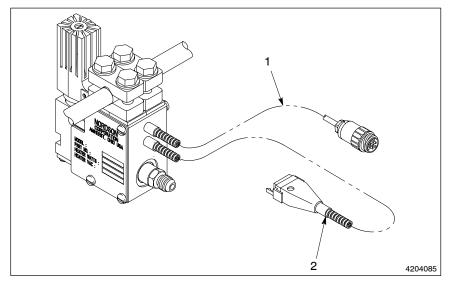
Connecting the Coil Cordset to the Gun Driver
